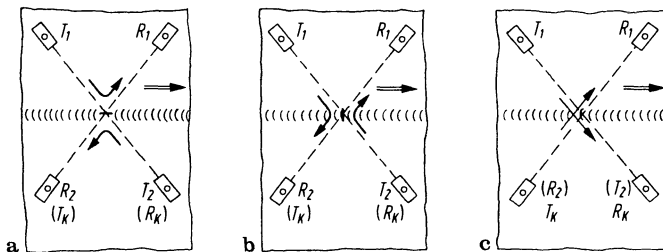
Testing of submerged-arc welded joints by means of separate transmitting and receiving probes. a For longitudinal defects; b for transverse defects; c control cycles
